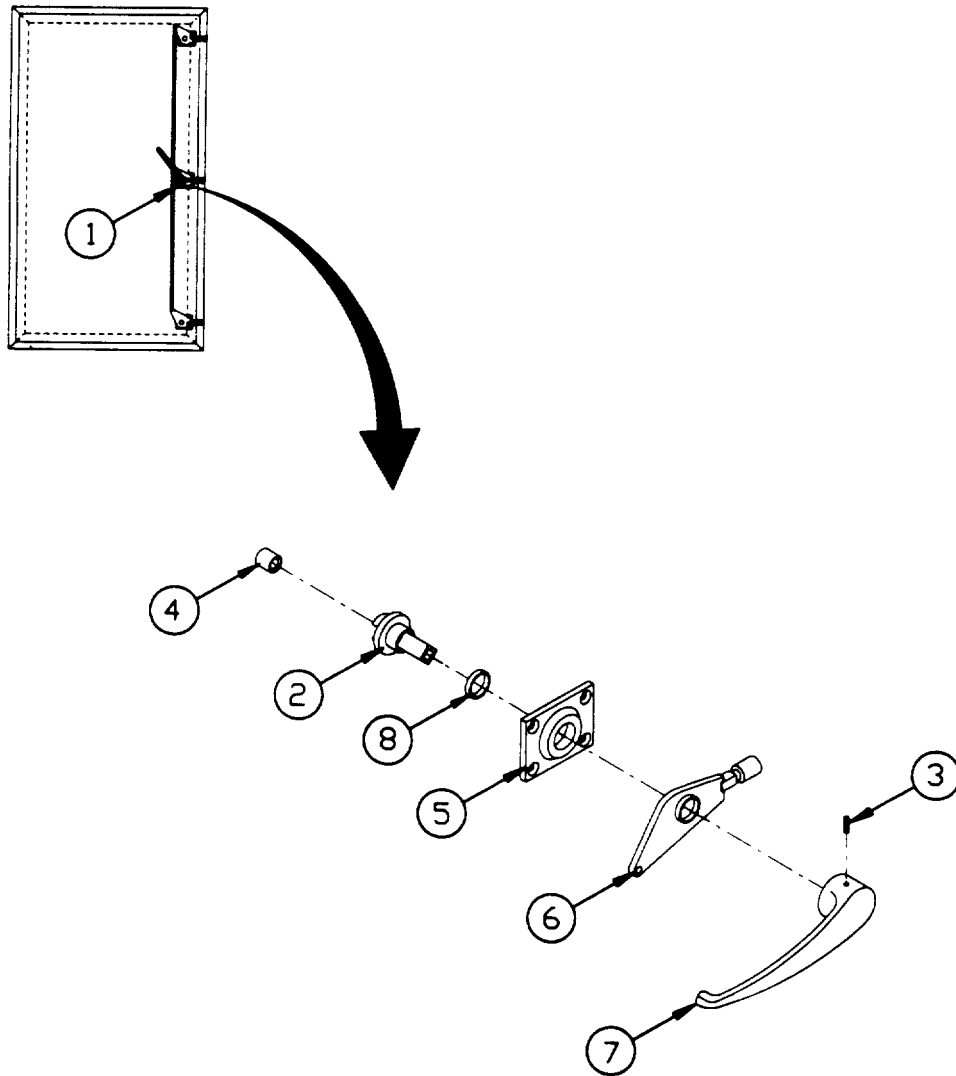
HANDLE ASSEMBLY, DOOR INSIDE
